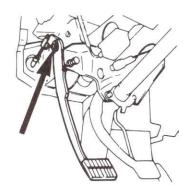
Clutch pedal E-clip location (Sec 5)
